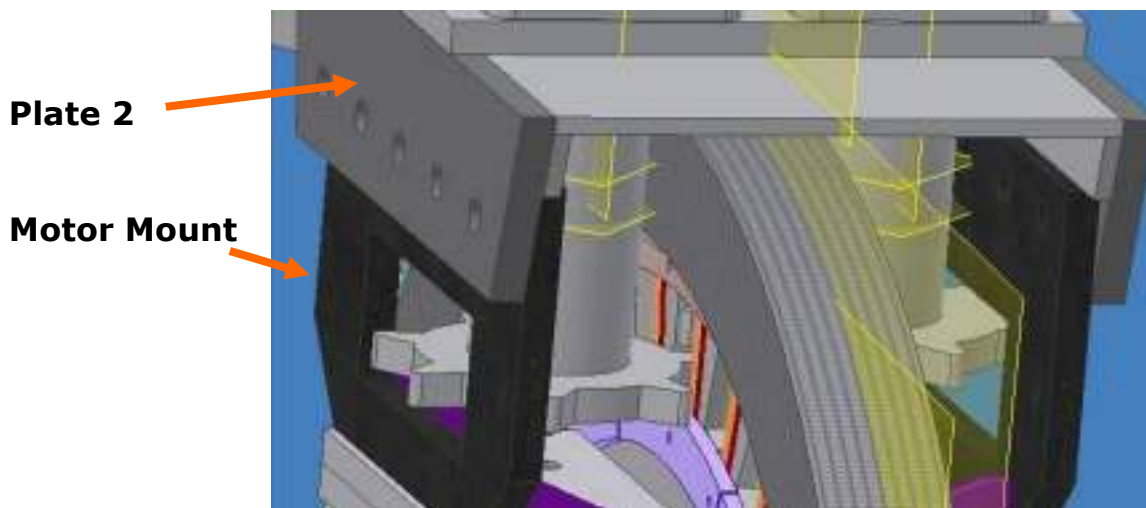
Visual of the Channel Frame Motor Mount Assembly.
